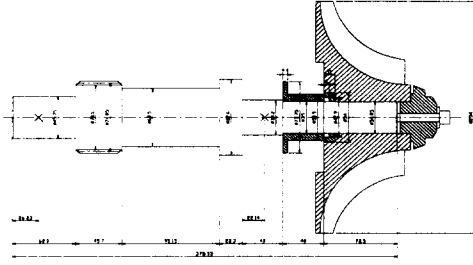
Schematic of the turbo-chiller compressor rotor assembly.
